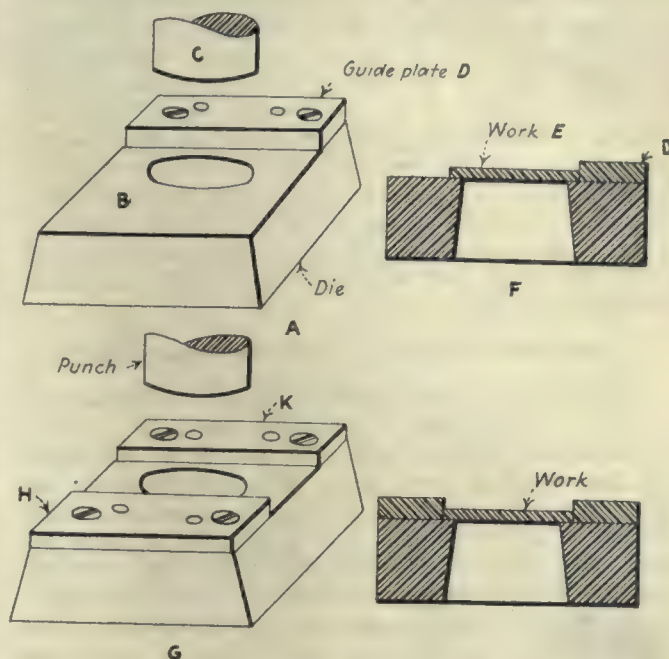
GUIDE PLATES USED ON BLANKING DIES
